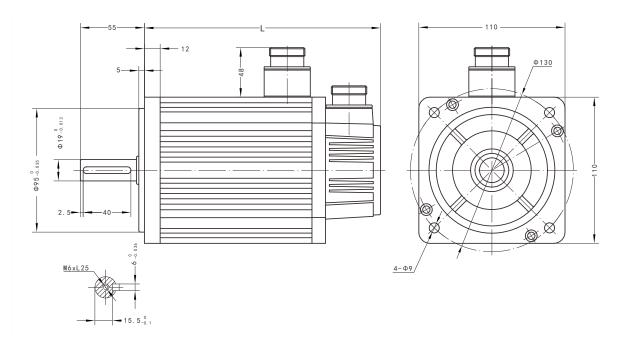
Installation dimensions of WE series 110 flange servo motor
